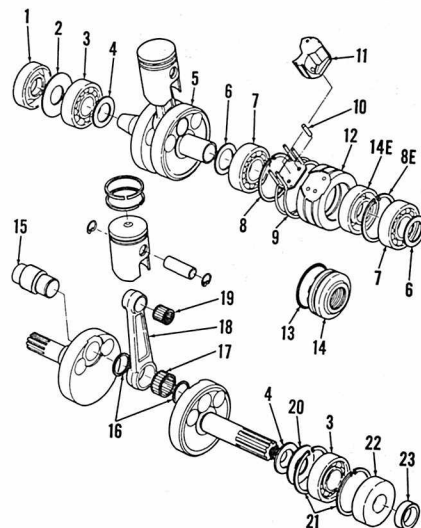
Exploded view of the crankshaft assembly. Parts (8E & 14E) should be discarded if later type seal (13 & 14) is installed
